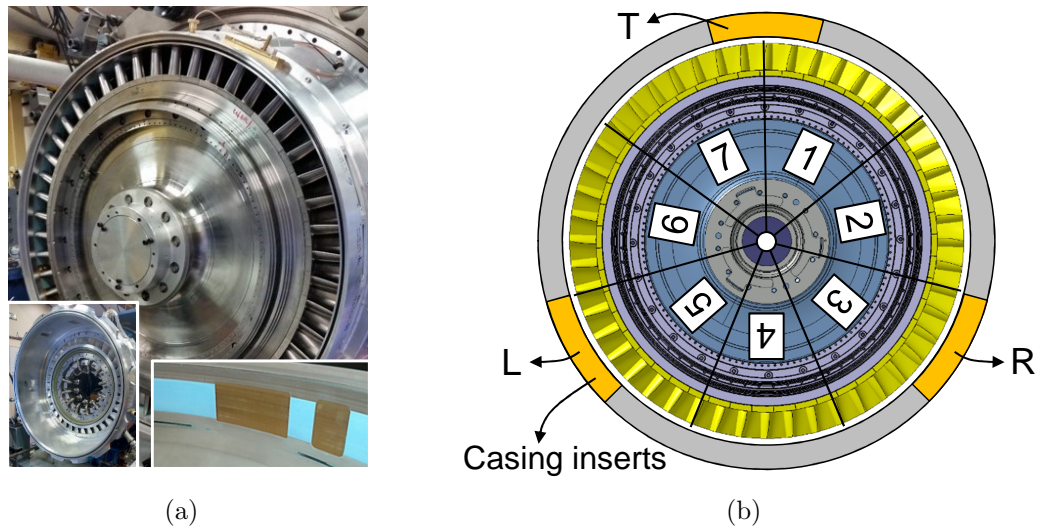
View of the turbine assembly (a) and the rainbow rotor configuration (b).
